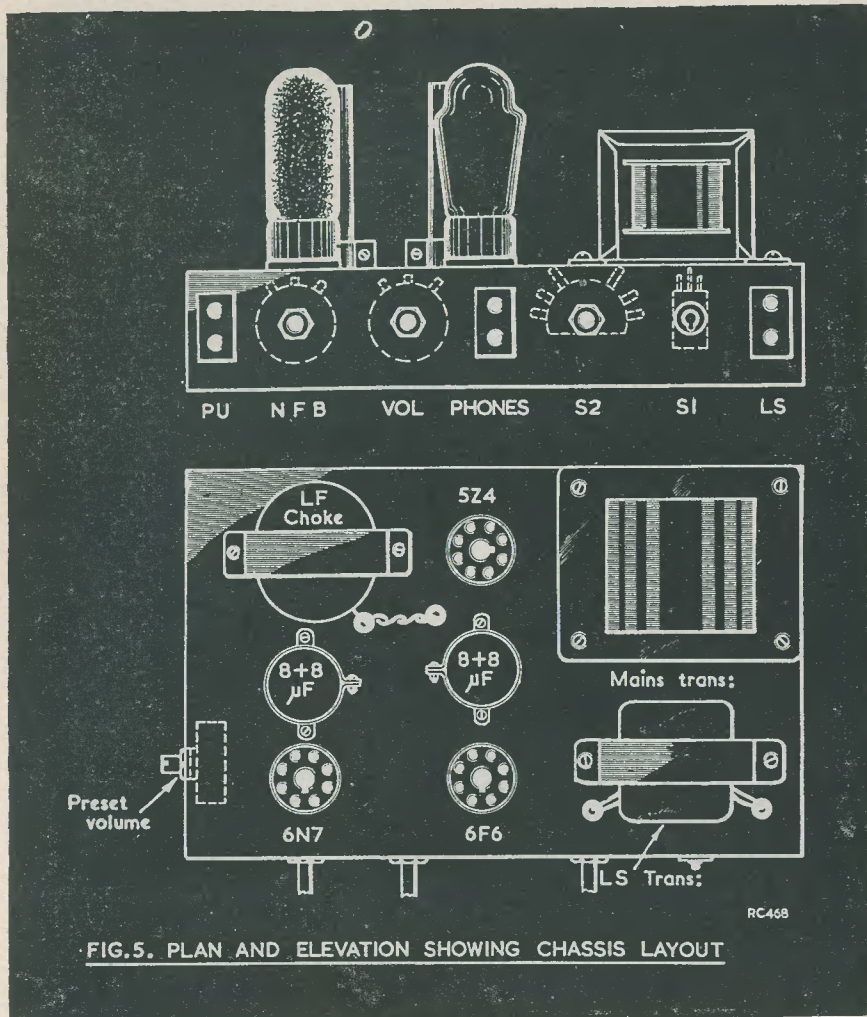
PLAN AND ELEVATION SHOWING CHASSIS LAYOUT
